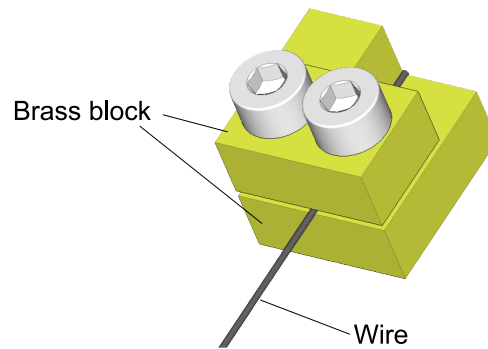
A wire clamp on the top stage. Similar clamps are used in the other parts of the suspension.
